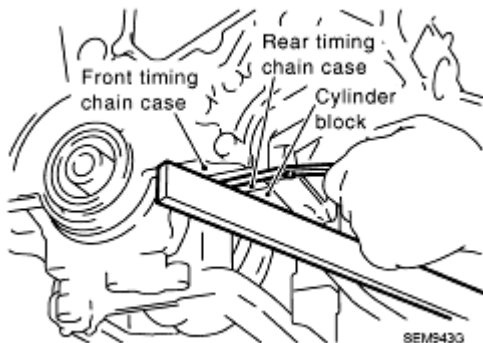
Checking Surface Height Difference Between Following Parts On Oil Pan (Upper) Mounting Surface
